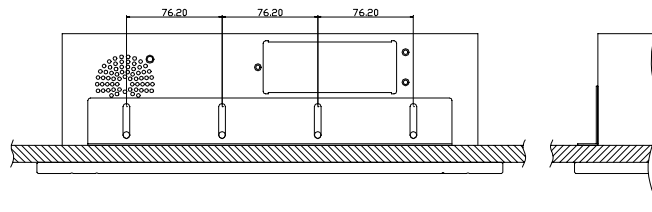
DISPLAY PAC OP CHASSIS MOUNTING
